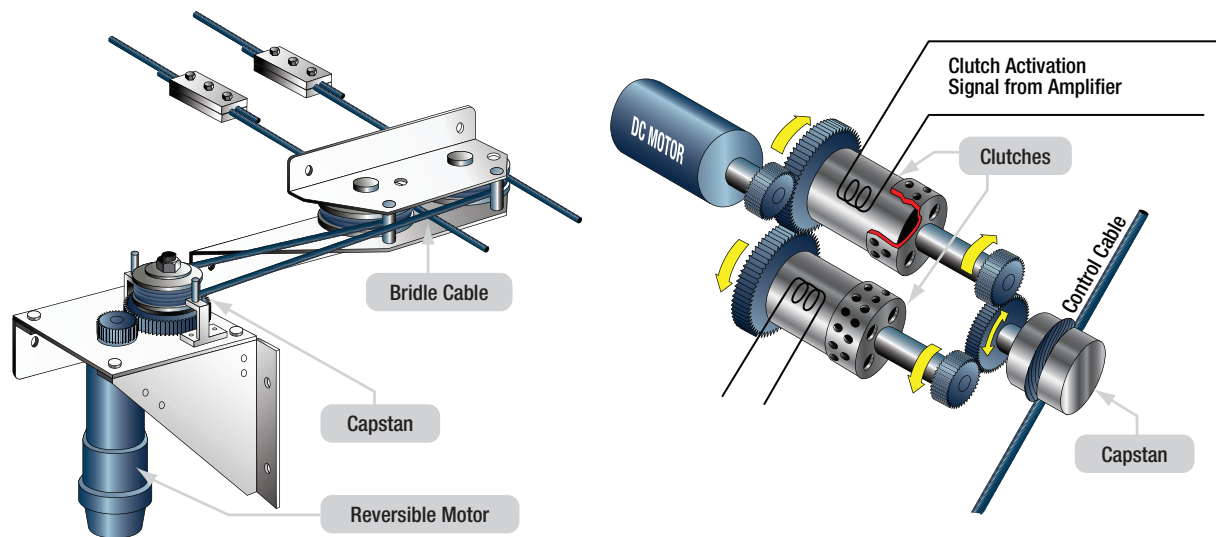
A reversible motor with capstan and bridle cable (left), and a single-direction constant motor with clutches that drive the output shafts and control cable in opposite directions (right).
